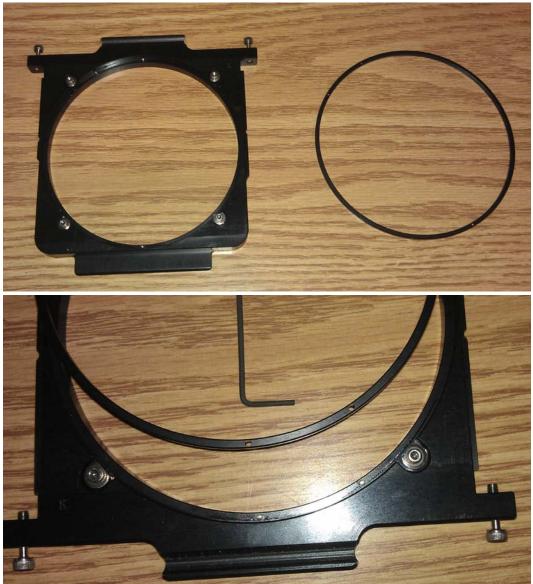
Mask holder with retaining ring removed (top). The 4 clamps can be seen around the inner edge of the holder. Alignment pins can also be seen at approximately the 6, 11, and 12 o'clock positions. A close-up is shown (bottom) where you can see the clamps and alignment pins.
